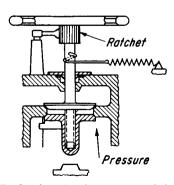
A valve stem has two oppositely moving valve cones. When opening, the upper cone moves up first, until it contacts its stop. Further turning of the valve wheel forces the lower cone out of its seat. The spring is wound up at the same time. When the ratchet is released, the spring pulls both cones into their seats.
